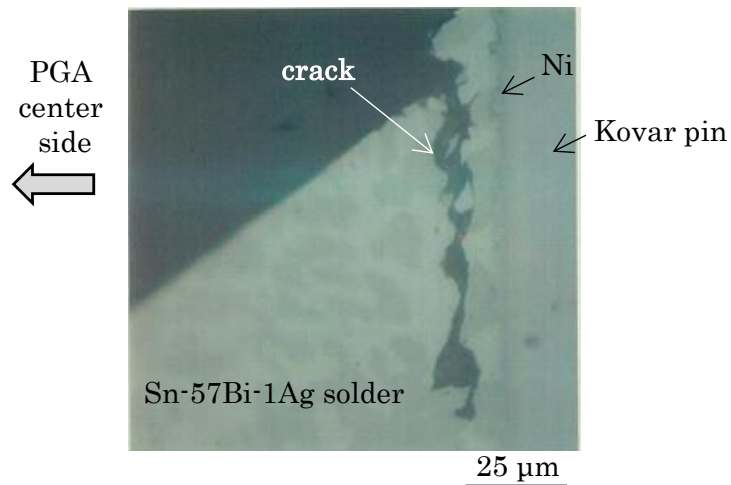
Crack occurred in Sn-57Bi-1Ag solder joint (0~90 °C, 1000 cycles).
